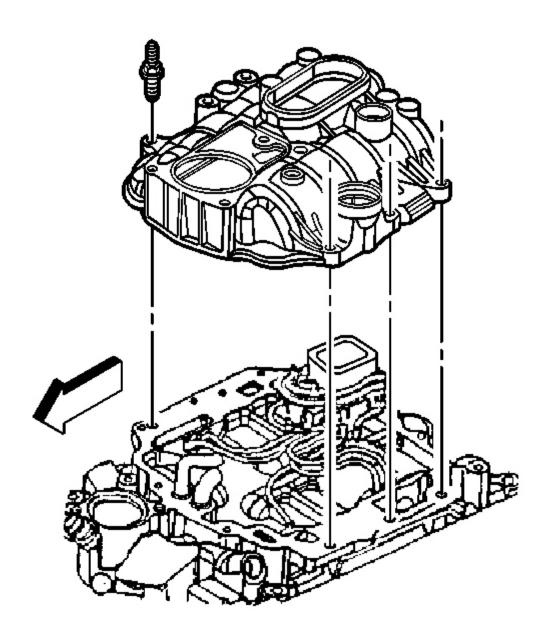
Identifying Upper Intake Manifold Attaching Studs Courtesy of GENERAL MOTORS CORP.
